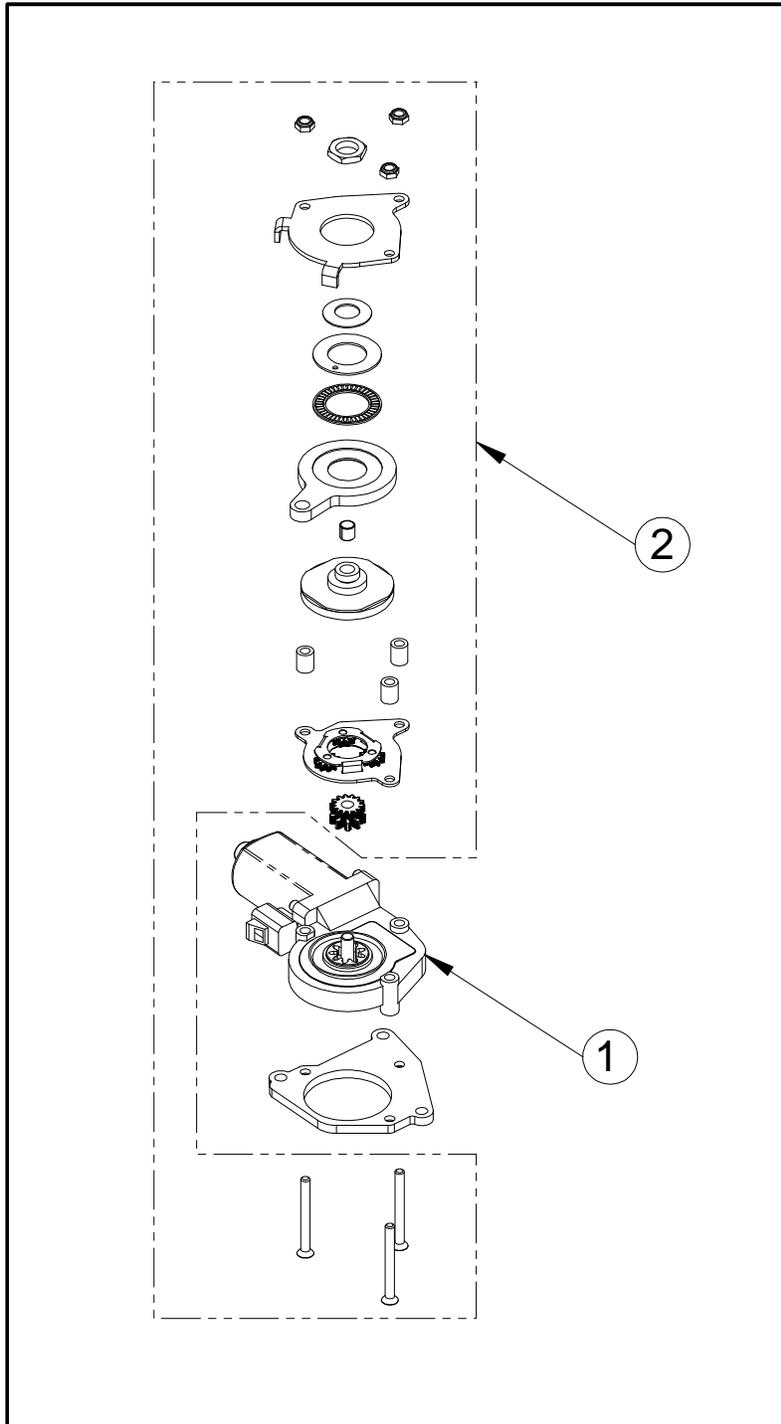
BRIDGEPLATE MOTOR ASSEMBLY
